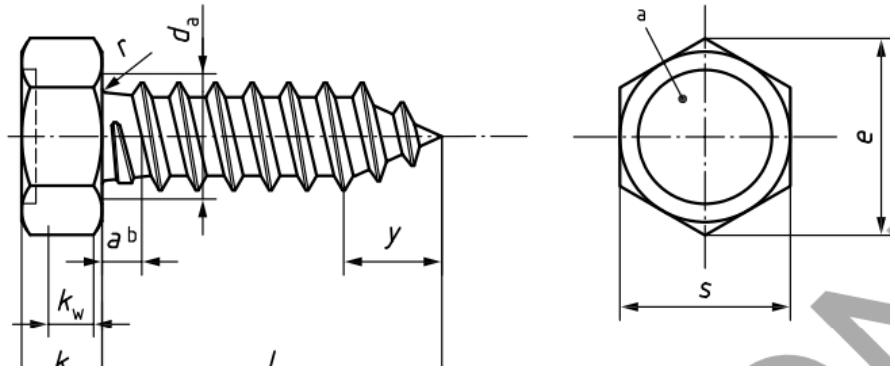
(A) HEXAGON HEAD (TYPE C END)
